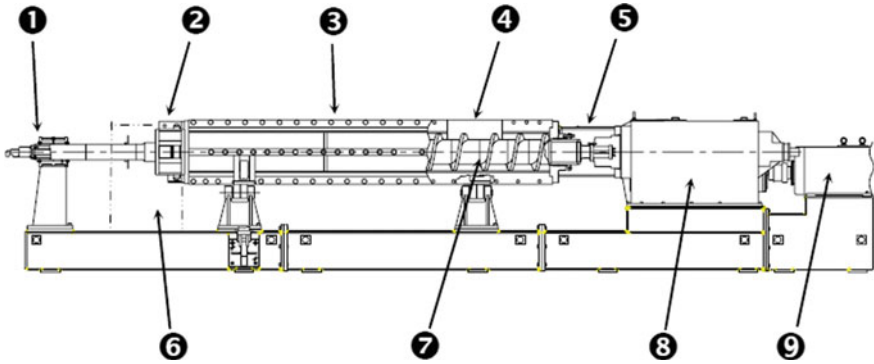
Kneader and its major components (1) outboard bearing support stand, (2) discharge gate, (3) split barrel, (4) feed inlet, (5) thrust yoke, (6) optional discharge chute, (7) kneading screw, (8) gear box and (9) drive motors
